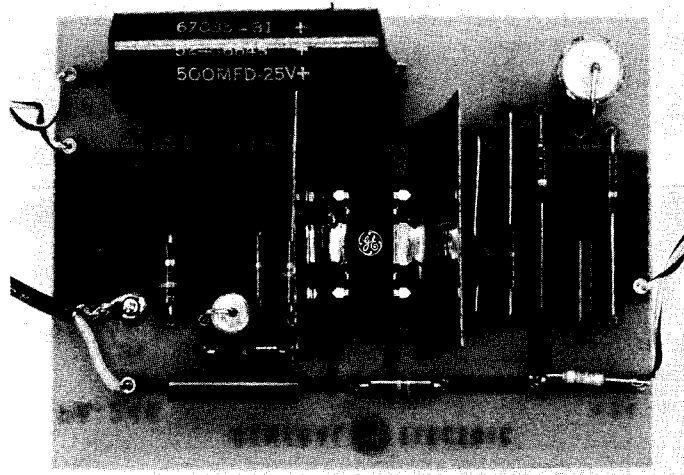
Completed Circuit Assembly of Amplifier Shown in Figure 2
